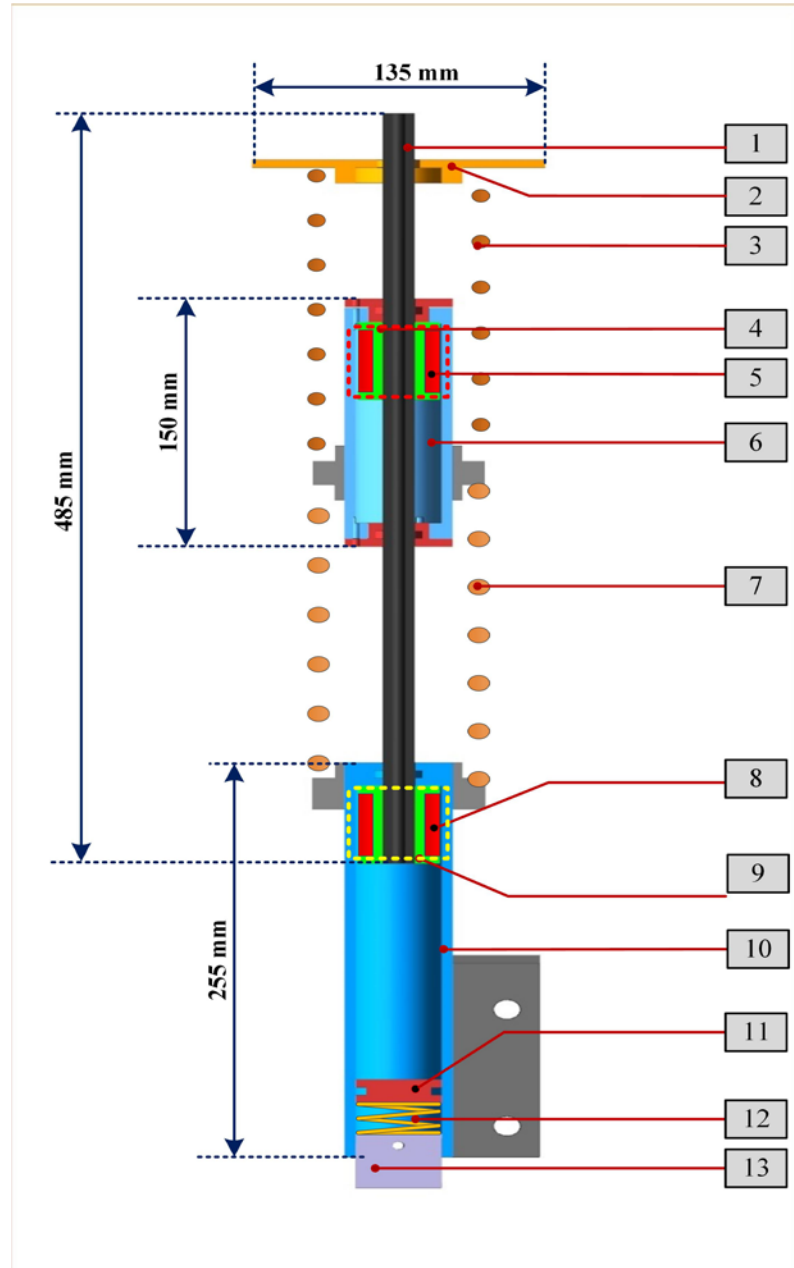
Schematic of VSVD suspension (1) shaft, (2) top cover, (3) spring 1, (4) upper piston, (5) coil for stiffness, (6) cylinder 2, (7) spring 2, (8) coil for damping, (9) cylinder 1, (10) lower piston, (11) floating piston, (12) accumulator spring, (13) bottom block.
